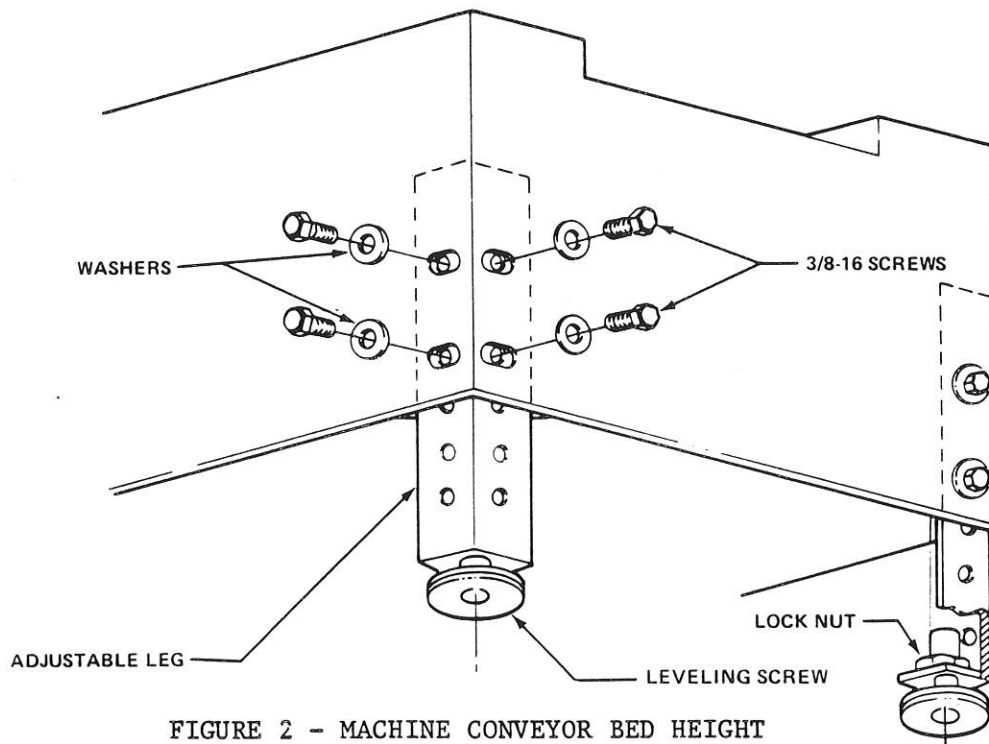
MACHINE CONVEYOR BED HEIGHT
